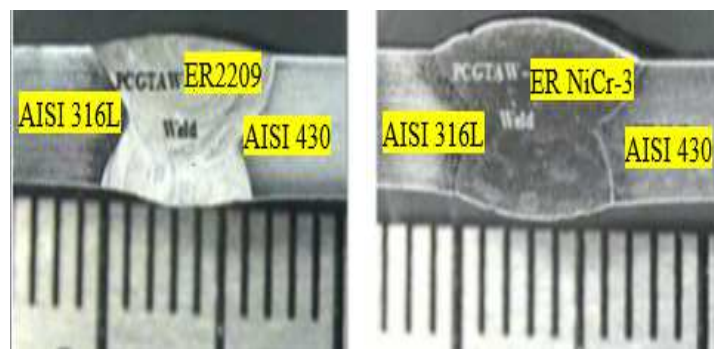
Macrostructure Images of Dissimilar Weldments of AISI 430 and AISI 316L Employed by PCGTA Weld using (a) ER2209; (b) ERNiCr-3 Fillers
